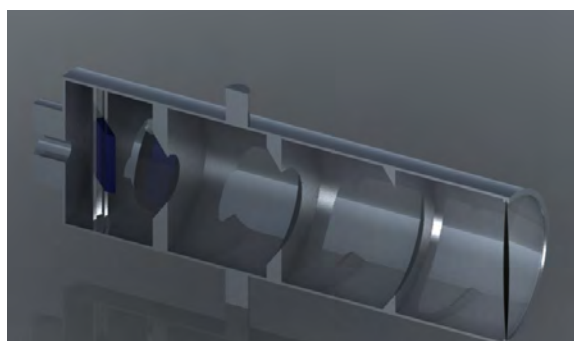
SHAIRC Cross-Section Illustrating baffling
